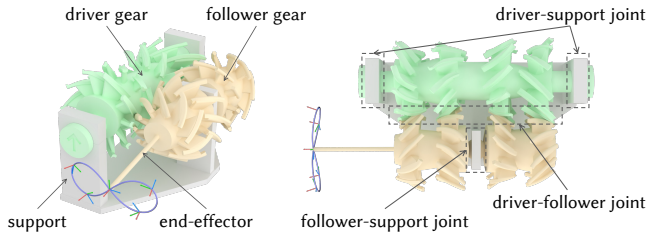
A multi-point conjugation gear mechanism (mpcGear_3R) consists of a driver gear, a follower gear, a support, and the joints connecting them. An end-effector is attached to the follower gear to visualize the user-specified motion. Here, the follower-support joint is a spherical joint.
